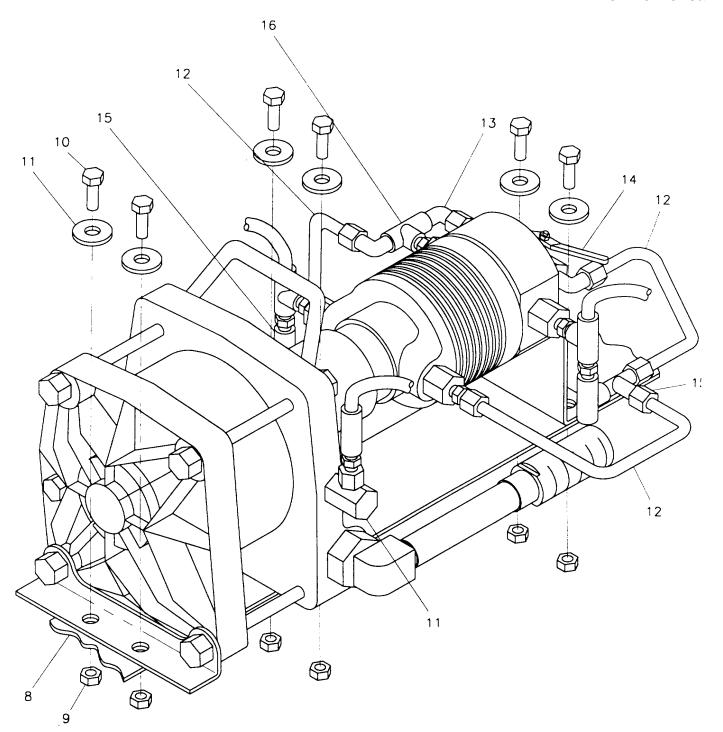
Transfer Pump Unit Replacement (Sheet 2)
